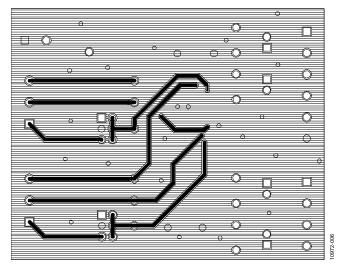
Bottom Layer PCB Rev. 0 | Page 7 of 8
